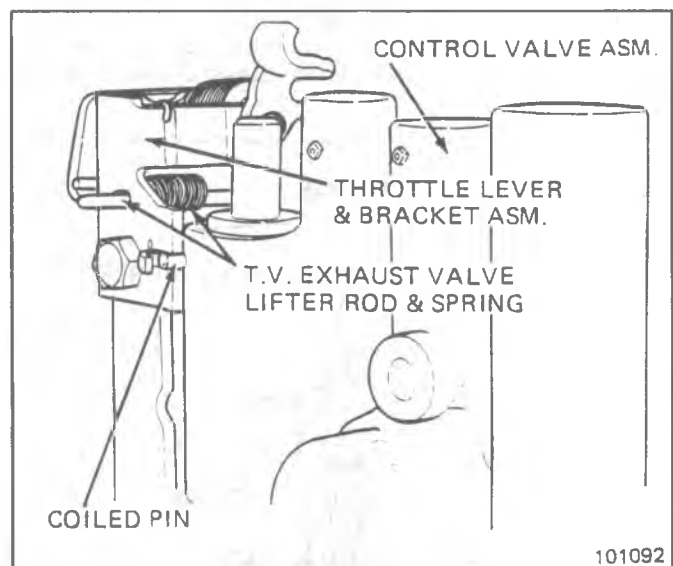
A-12--Alignment of Throttle Lever and Bracket Assembly
